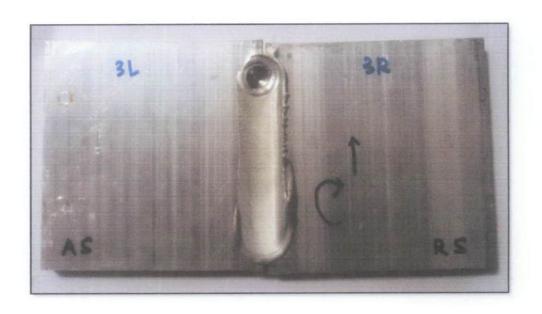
Sample 3, FSW plates (Round tool, 100 mm/min)
